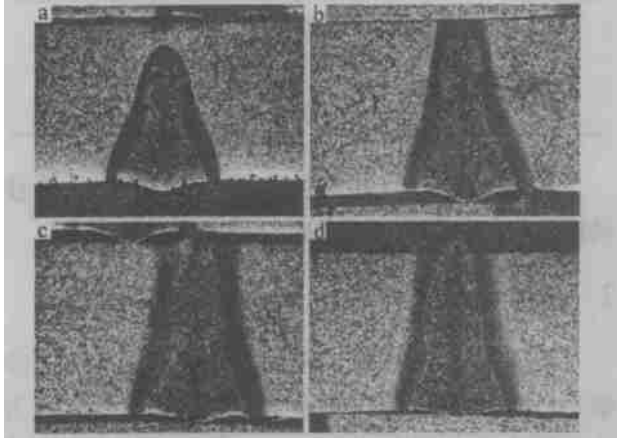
Weld seam cross section of No. 1~ No. 4
